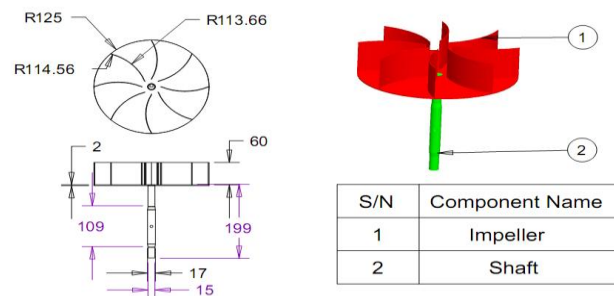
2D and 3D geometric models of the impeller-shaft subassembly
